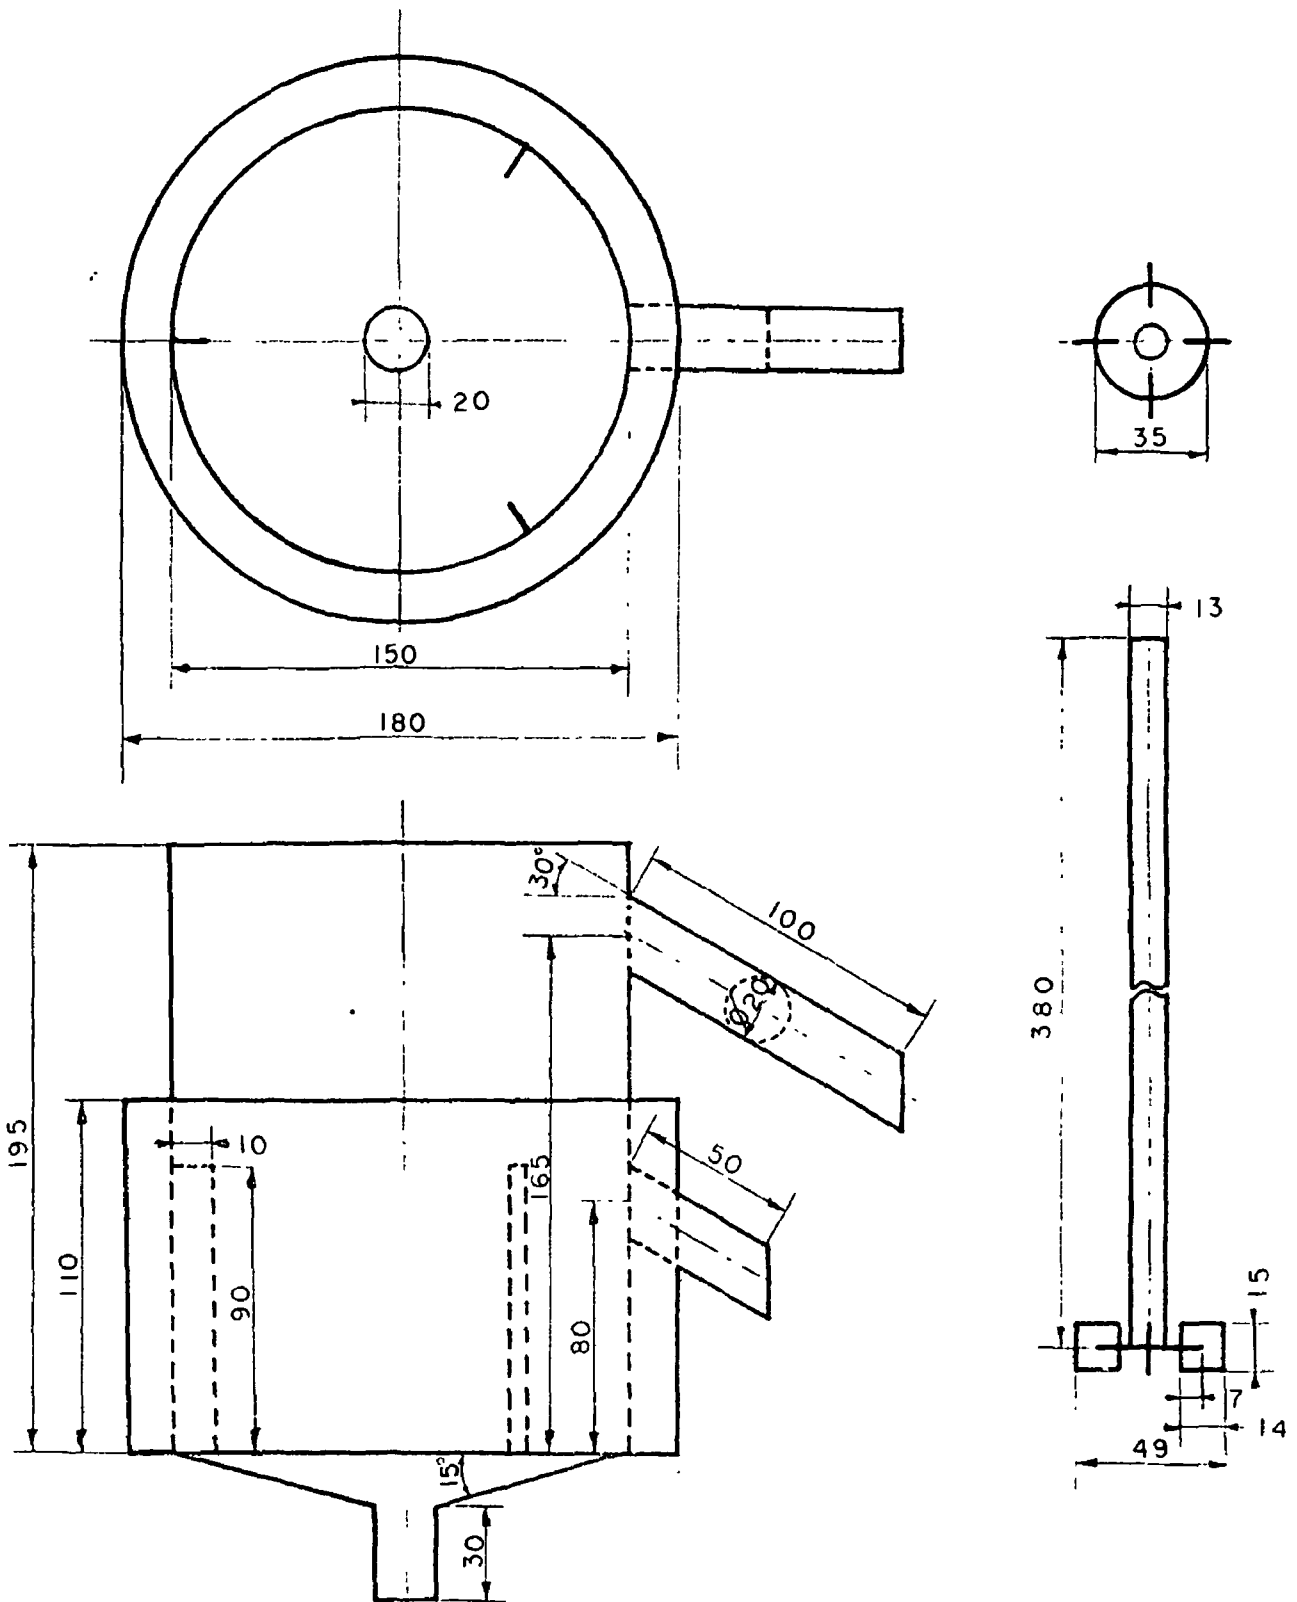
Detail Drawing of Preconditioning Tank and Stirring Impeller
